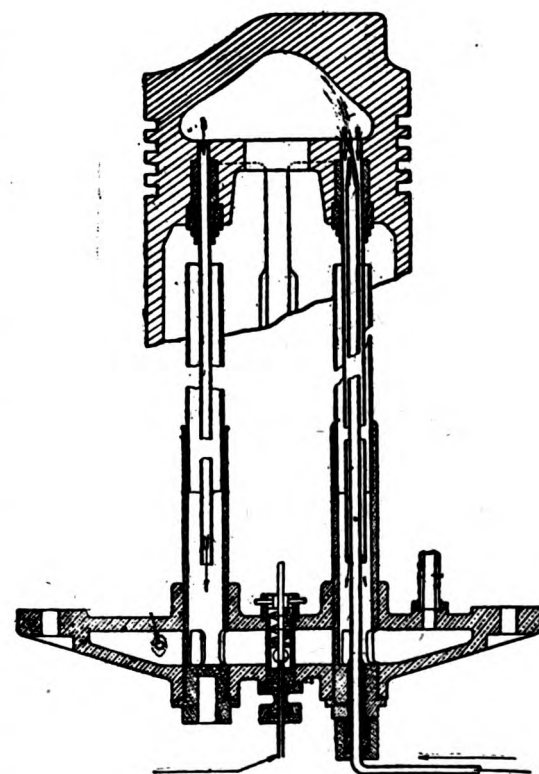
Piston cooling device of Polar Diesel engines of French motor gunboats
